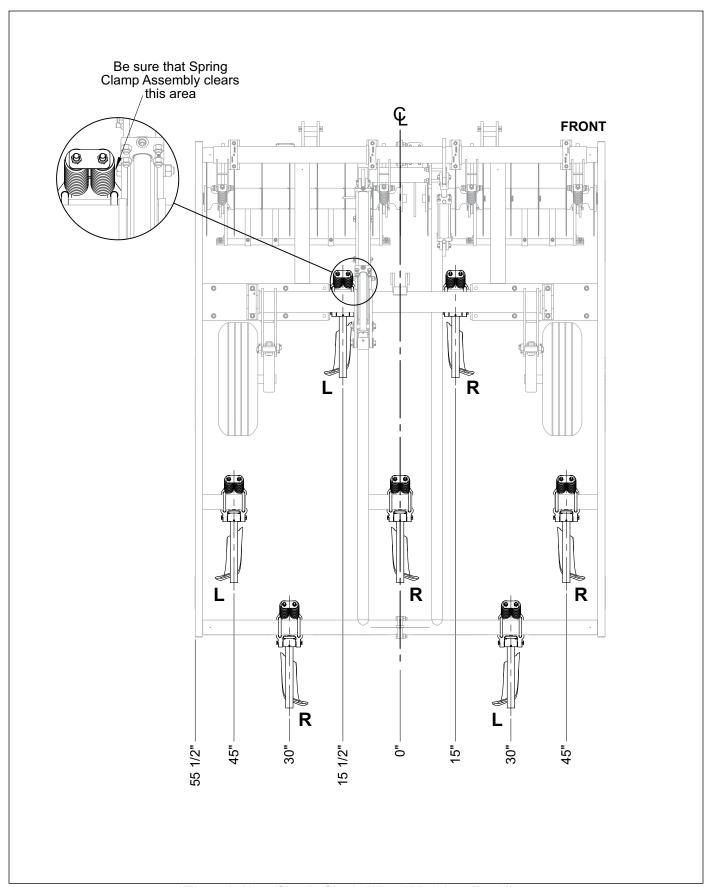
7 Shank, Single Wheel Machine, Top View
